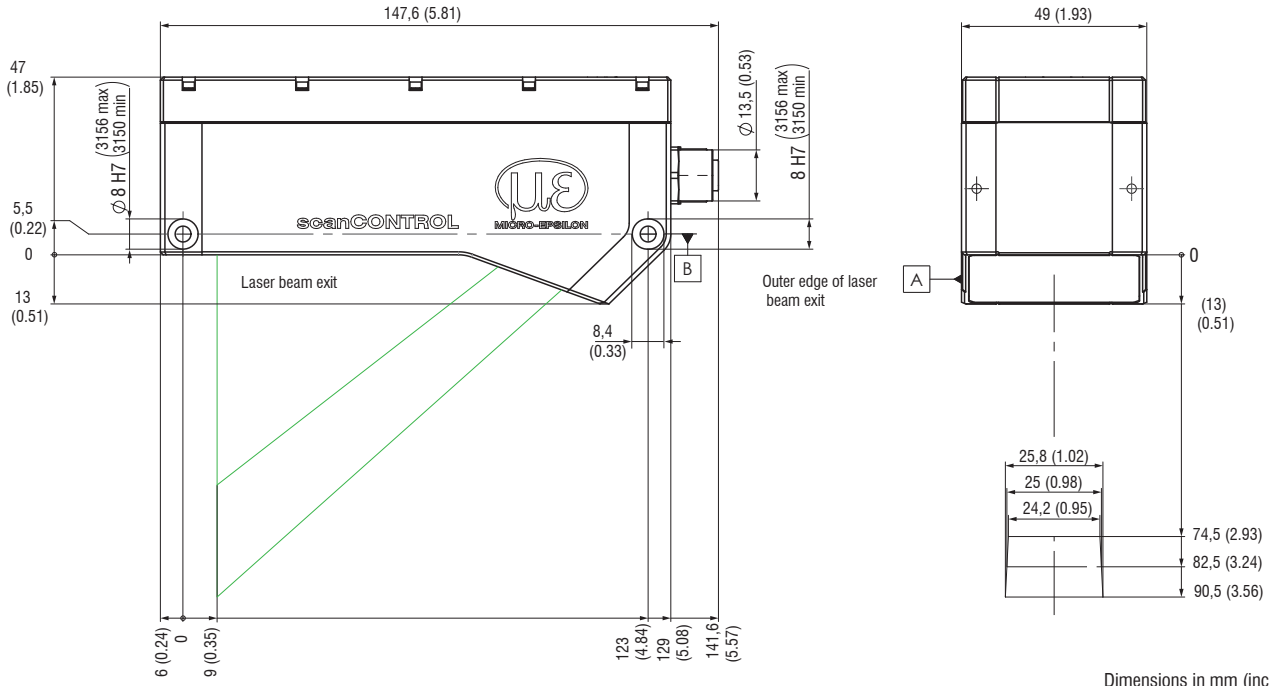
Dimensional drawing of scanCONTROL 8xxx-25 sensor
